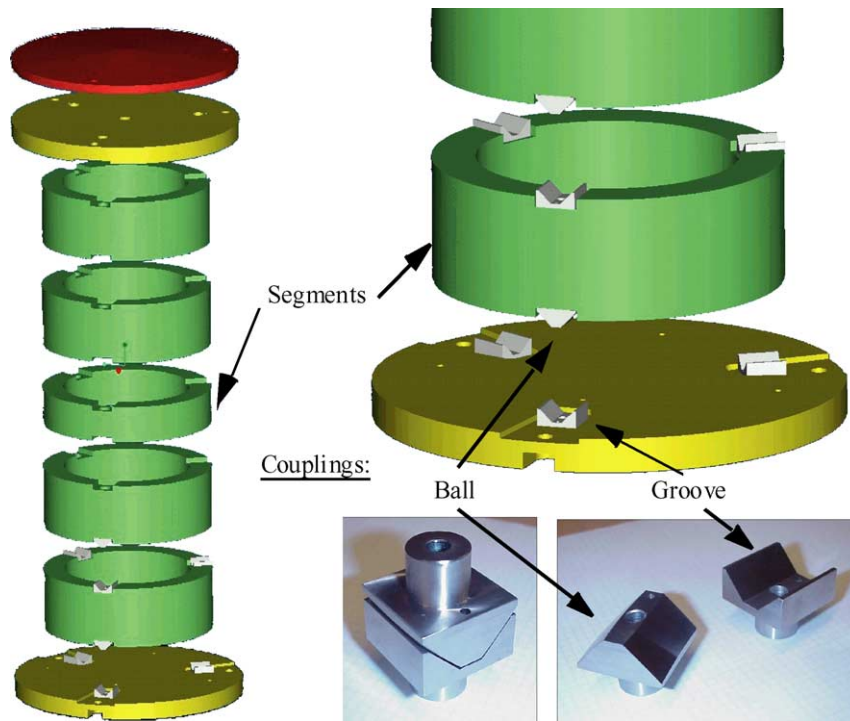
Exploded view of solid model of tube assembly (only bottom layer of kinematic couplings shown) and prototype stainless steel canoe ball kinematic couplings.
